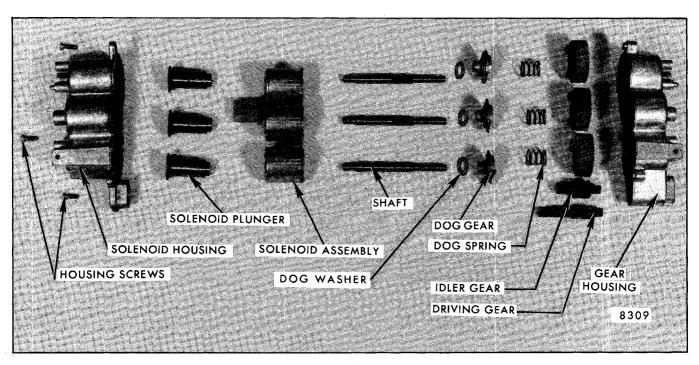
Six-Way Seat Adjuster Transmission Component Parts for 60-40, 50-50 (Except 6CB69 Style), 45-55 and Bucket Seats
